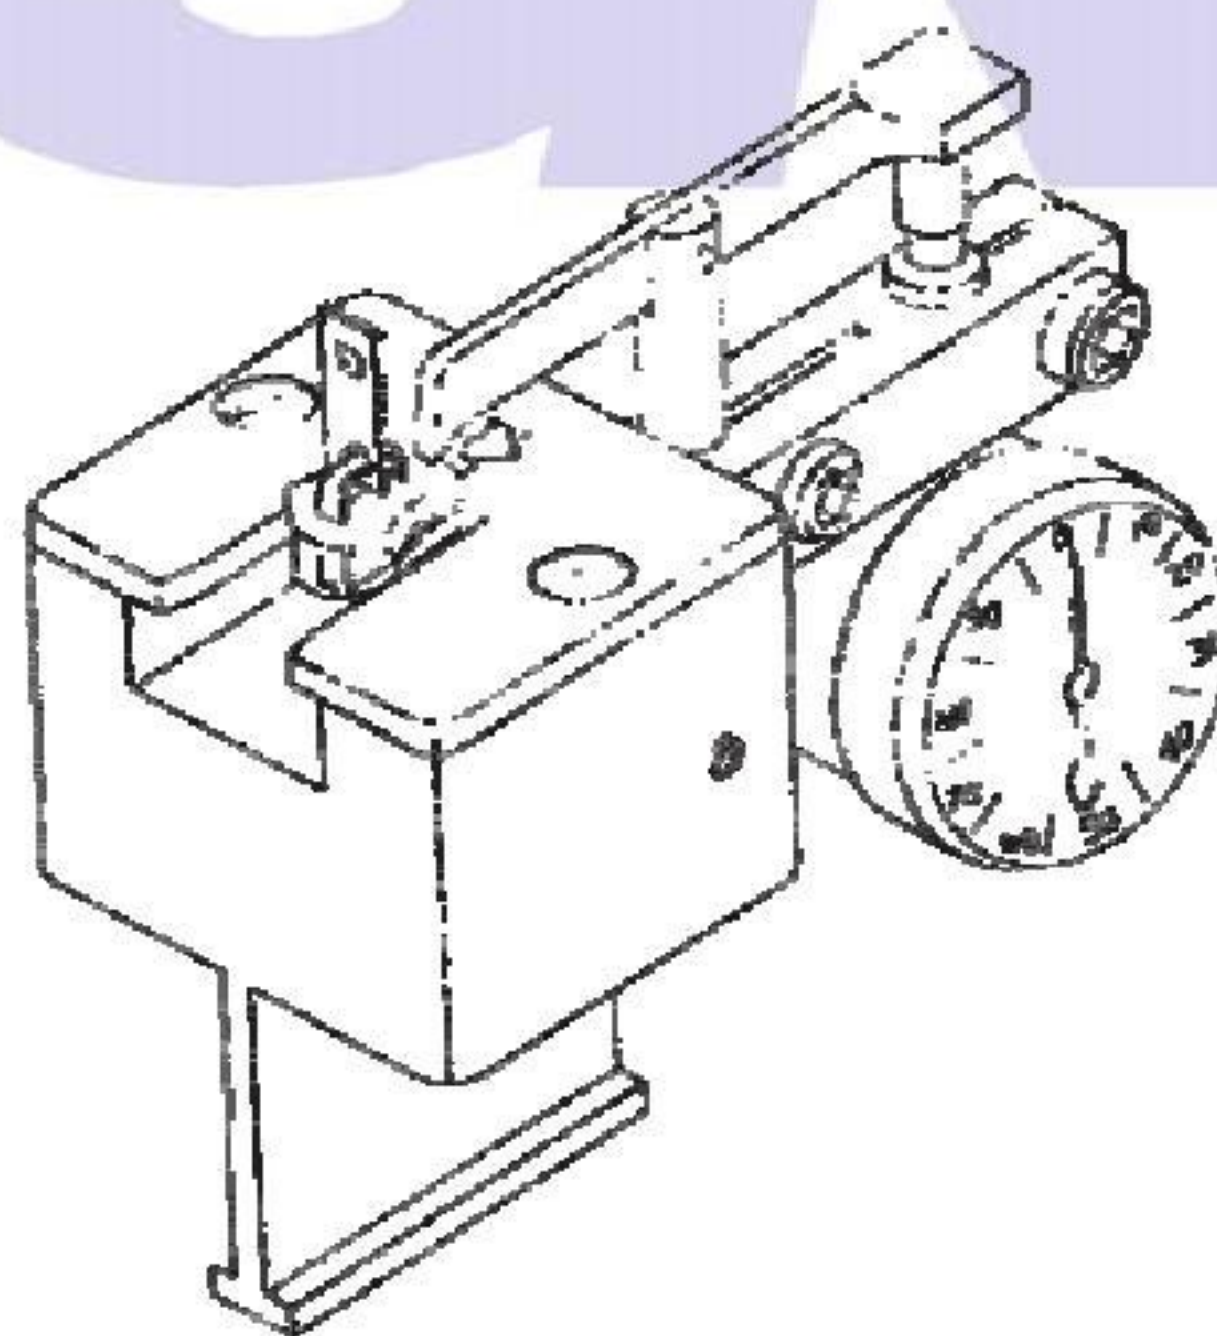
Fixture for Slider Deflection Test (Pull)
